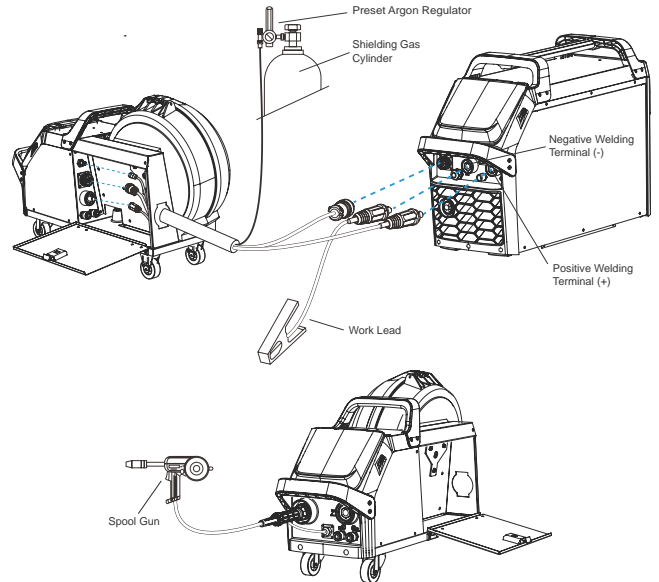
Setup with Spool Gun for Gas Shielded MIG Wire
